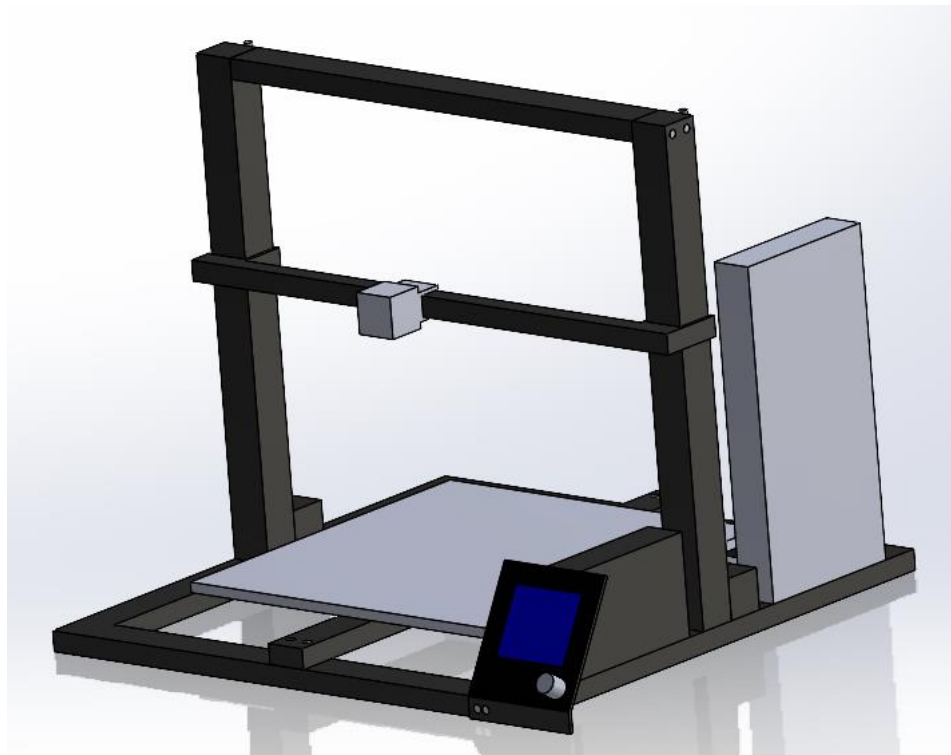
SolidWorks assembly of Single Extruder Desktop FDM 3-D Printer modeled for size reference.
